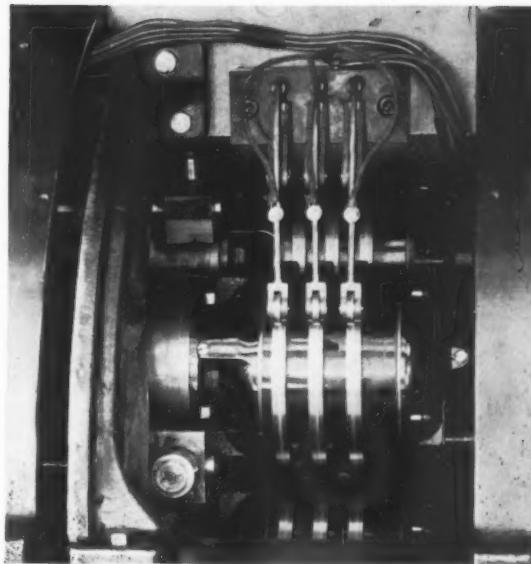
Electrical contact fingers supply power to motor as the spindle and chuck unit moves into loading position
